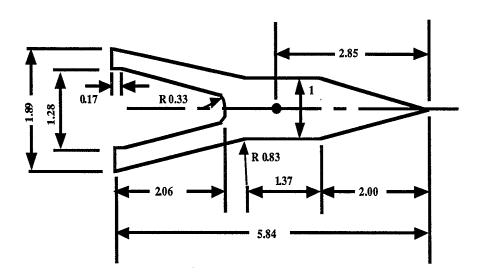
Schematic of the CAN-4 projectile with a deep base cavity (all dimensions: calibres)
